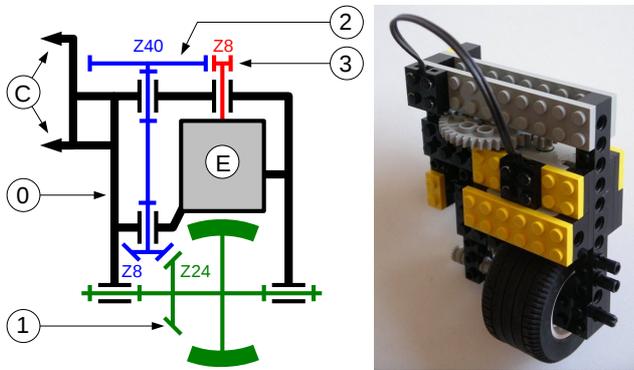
A wheel sub-assembly with actuator and speed reducer.
